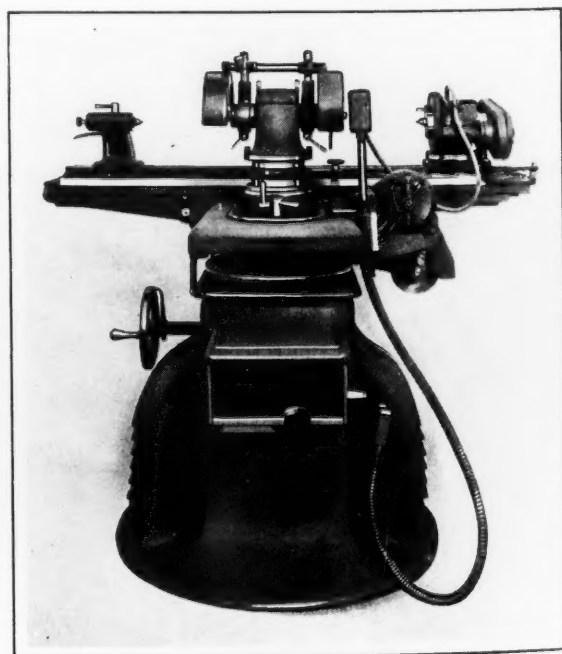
Rear View of Complete Motor-driven Universal Tool and Cutter Grinding Machine
